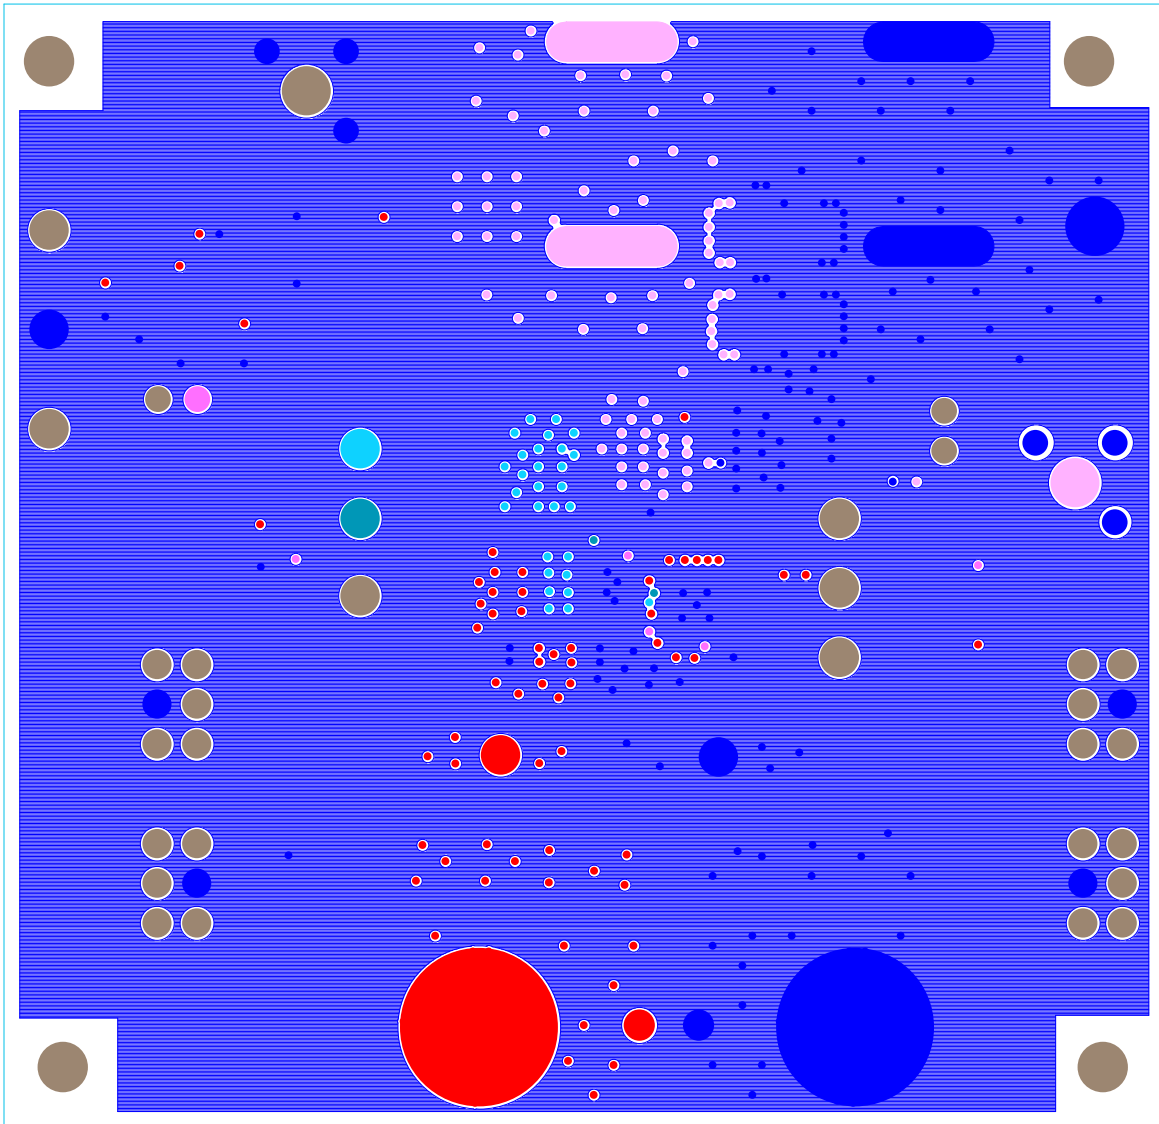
PCB - INNER LAYER 5 (TOP VIEW)
